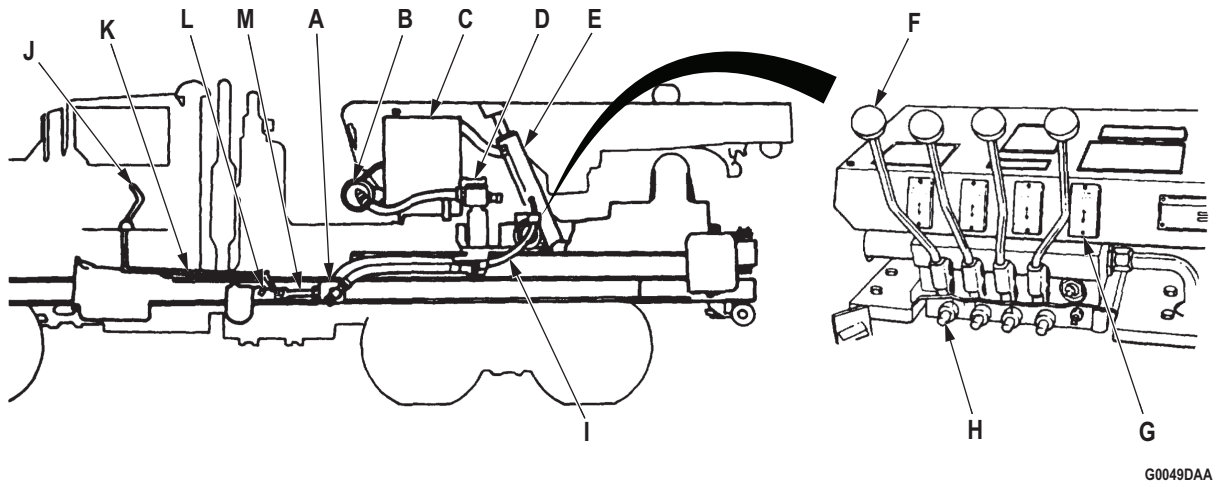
Medium Wrecker Crane Hydraulic System Components.
